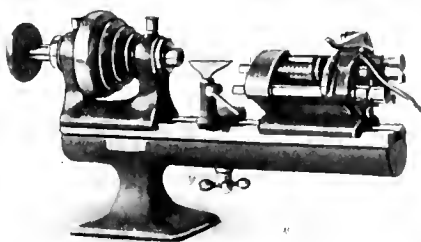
Precision Lathe with Three-spindle Tumble Tailstock
